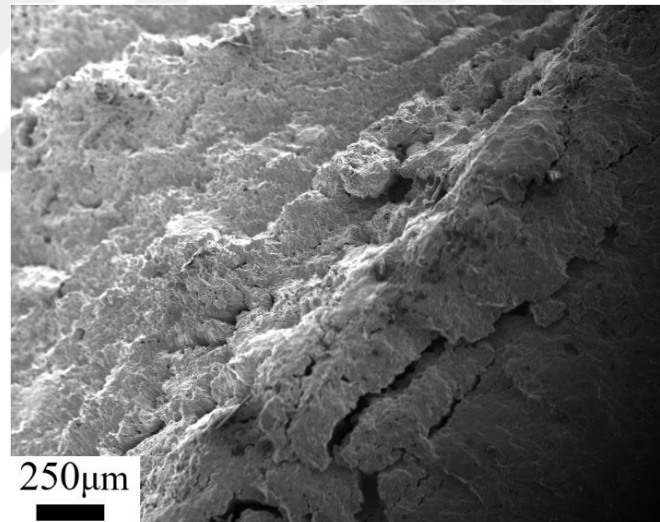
The fatigue fracture surface of unburnished 316L sample broken in 849.625 cycles, at 75% of σ_{yield} .
